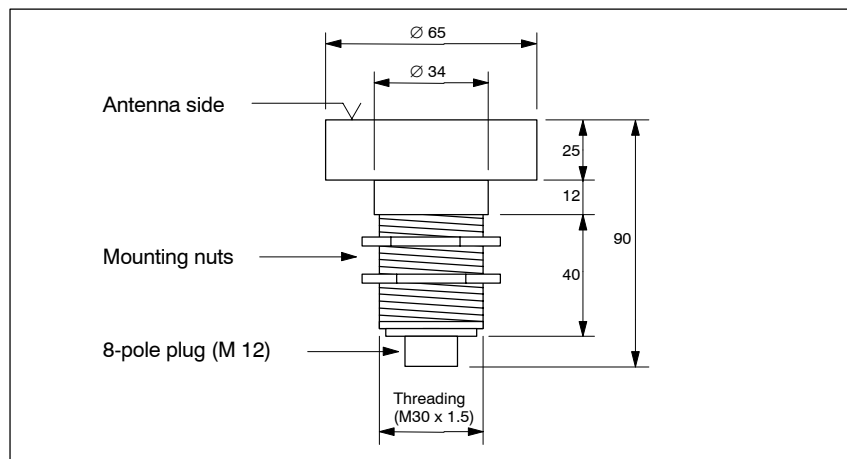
Dimensional drawing of antenna for SIM 82 (SLA 81)
